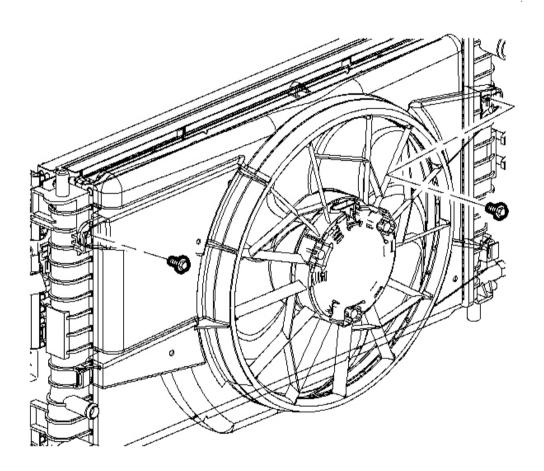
View Of Fan Assembly Bolts From The Radiator Courtesy of GENERAL MOTORS CORP.
